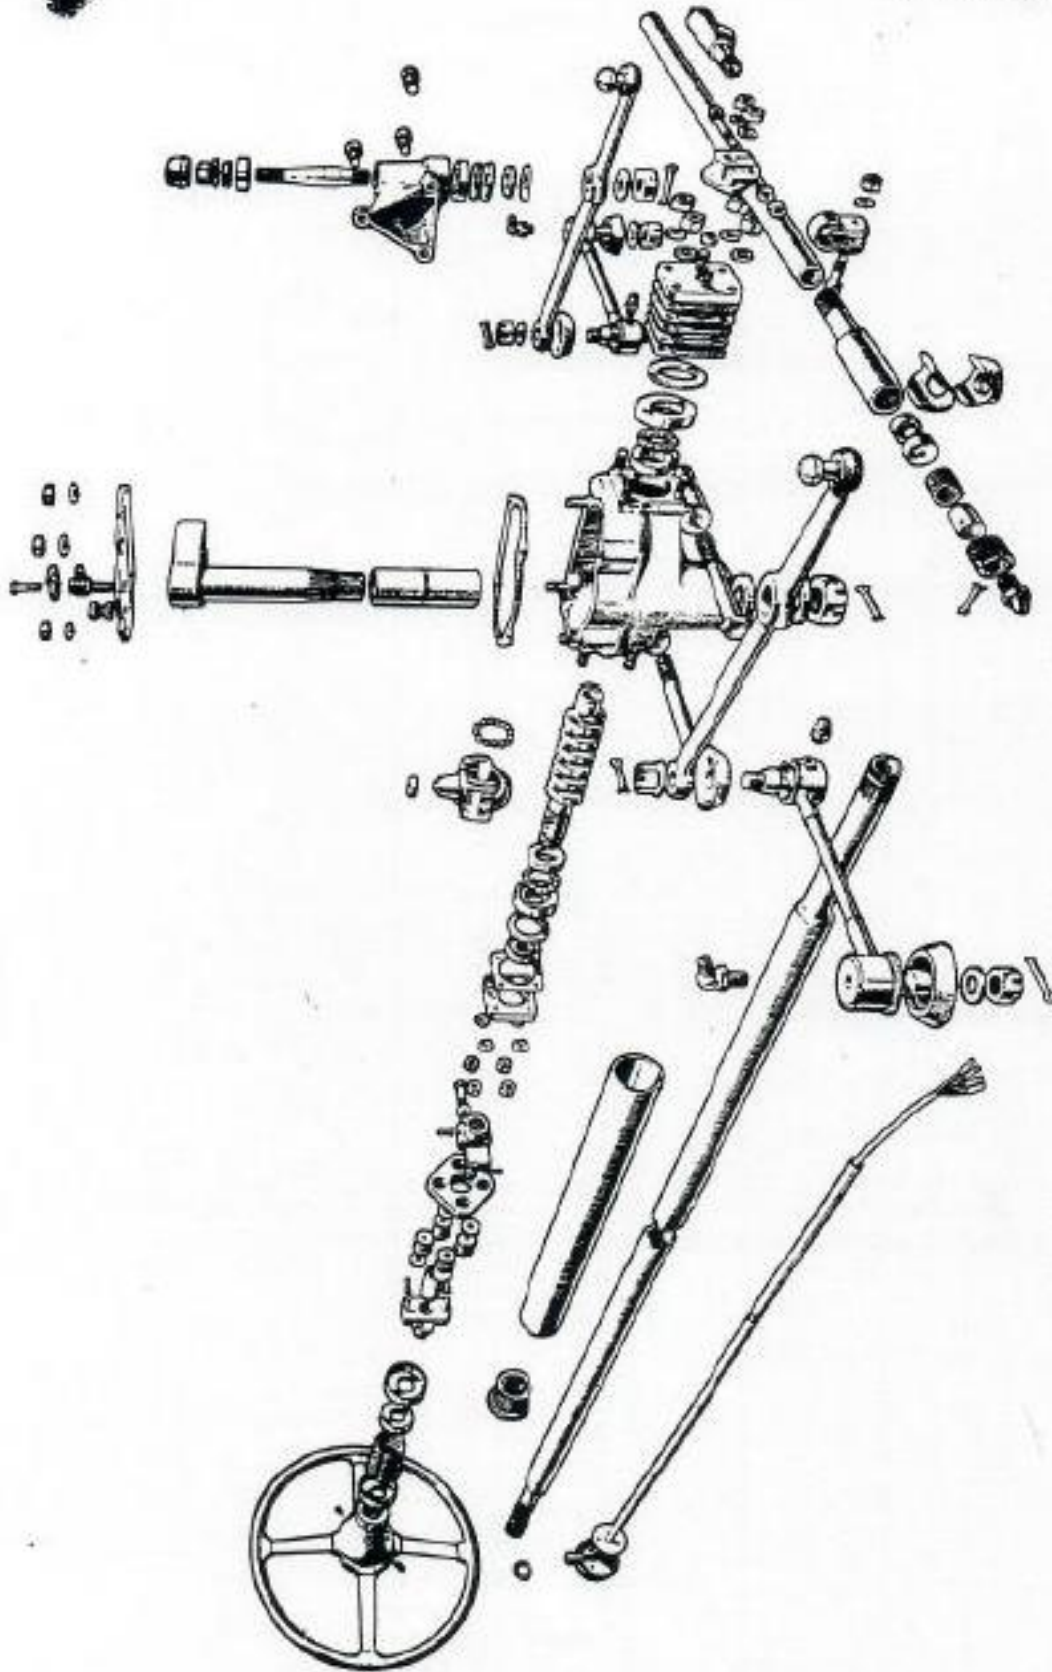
This steering gear assembly (Mark VIII, One-piece type drag-arm) illustrated. Exploded view.
